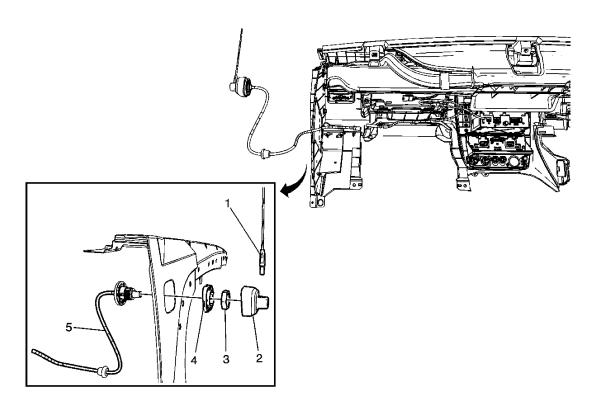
View Of Antenna Cable Courtesy of GENERAL MOTORS CORP.
